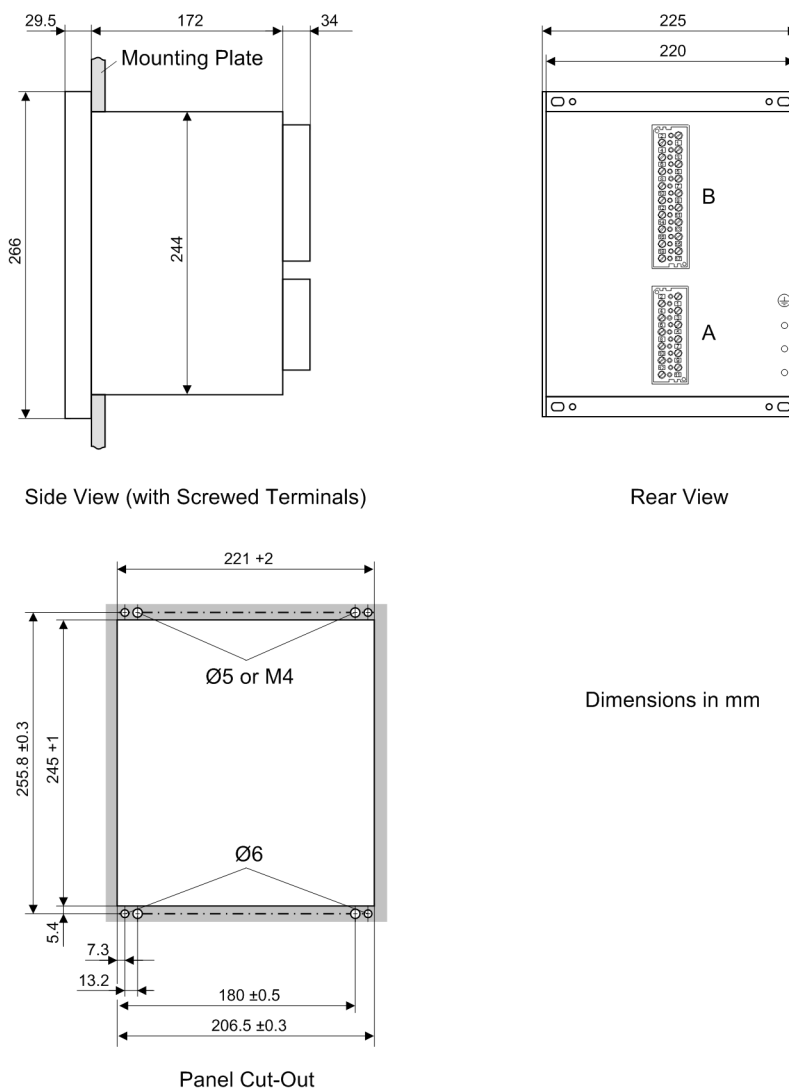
Dimensions of Resistor Unit 7XR6004-0CA00 for Panel Flush or Cubicle Mounting
